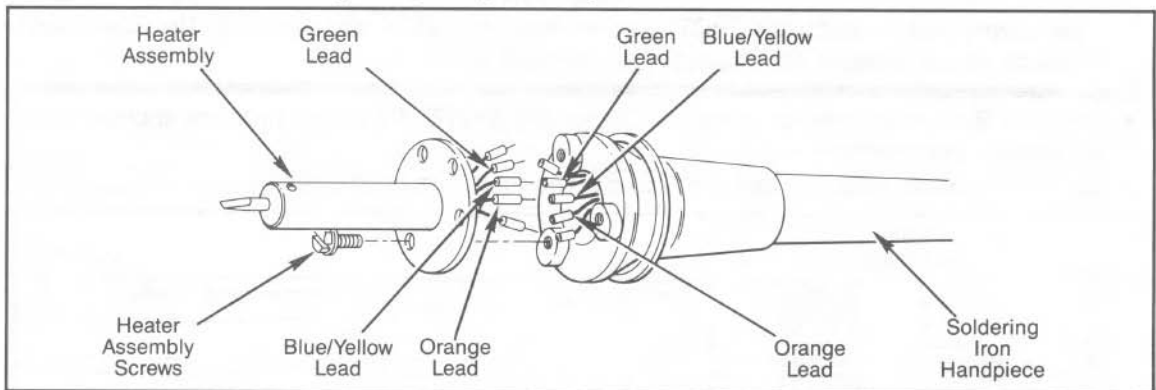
SOLDERING IRON HANDPIECE HEATER ASSEMBLY REPLACEMENT
